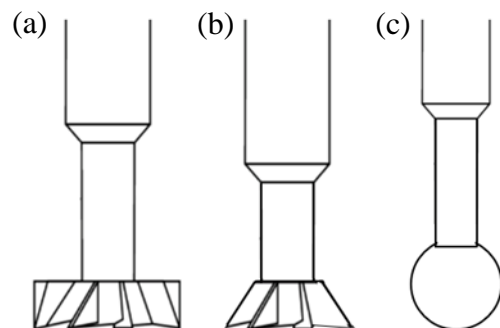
Undercutting machine tools: (a) t-slot cutter, (b) dovetail cutter, and (c) lollipop endmill
